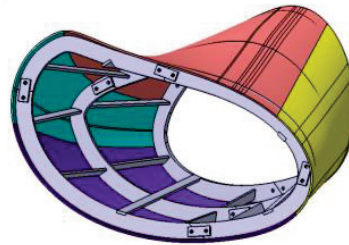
Material pieces divided plan for vacuum vessel manufacturing.
